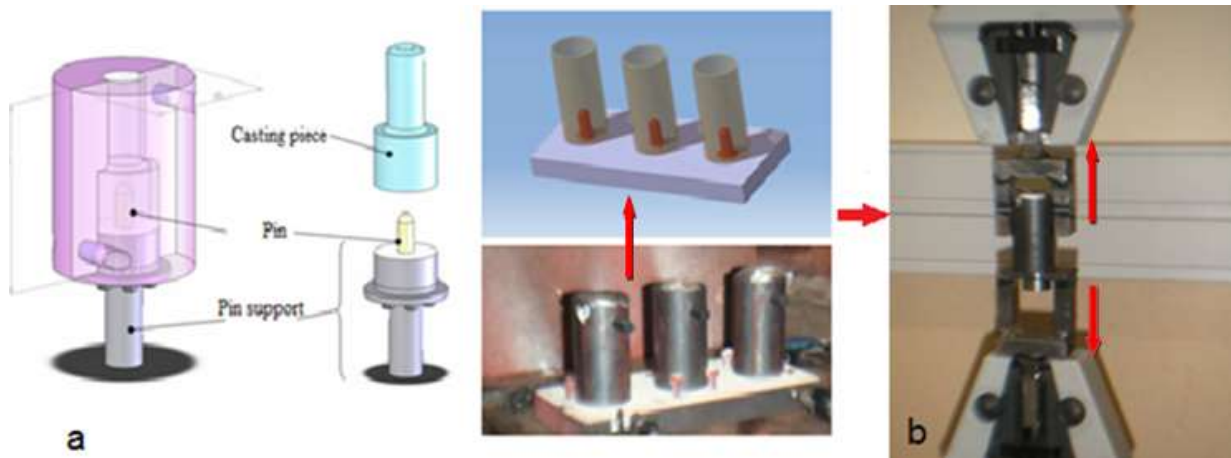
(a) Casting simulation system, (b) pin-casting assembly on the mechanical tensile testing machine
